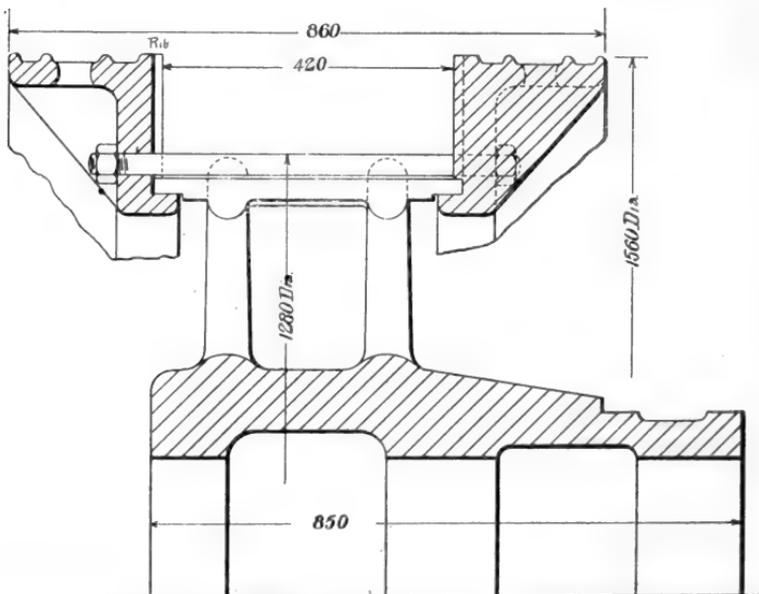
Armature Spider of 300 k.w. Generator, showing end Flanges.
